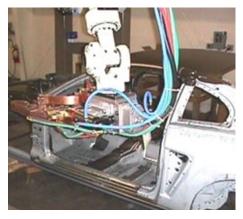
A robot spot welding a car body. [Courtesy of Kawasaki Robotics (USA), Inc.]
